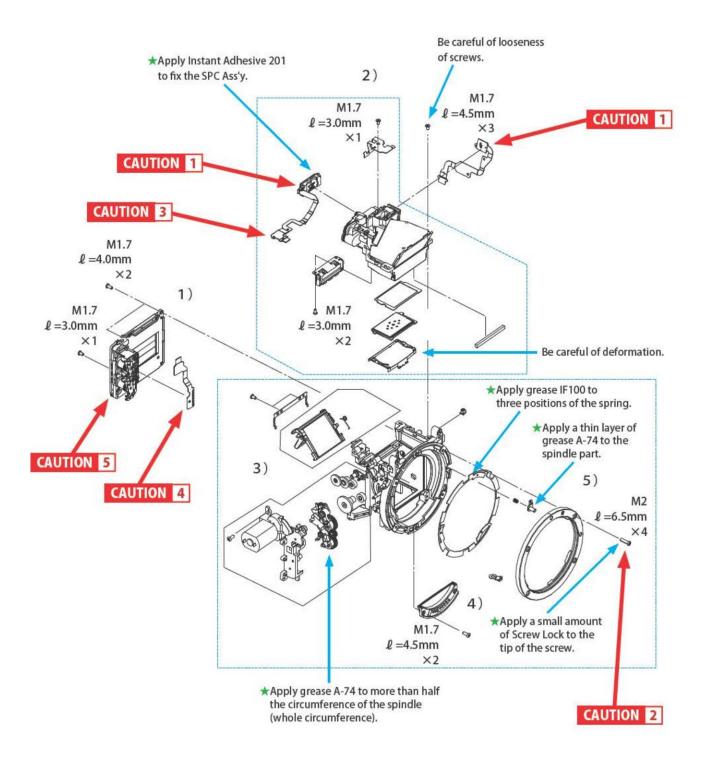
Removal of the Mirror Box Ass'y, Shutter Ass'y, and Finder Unit
